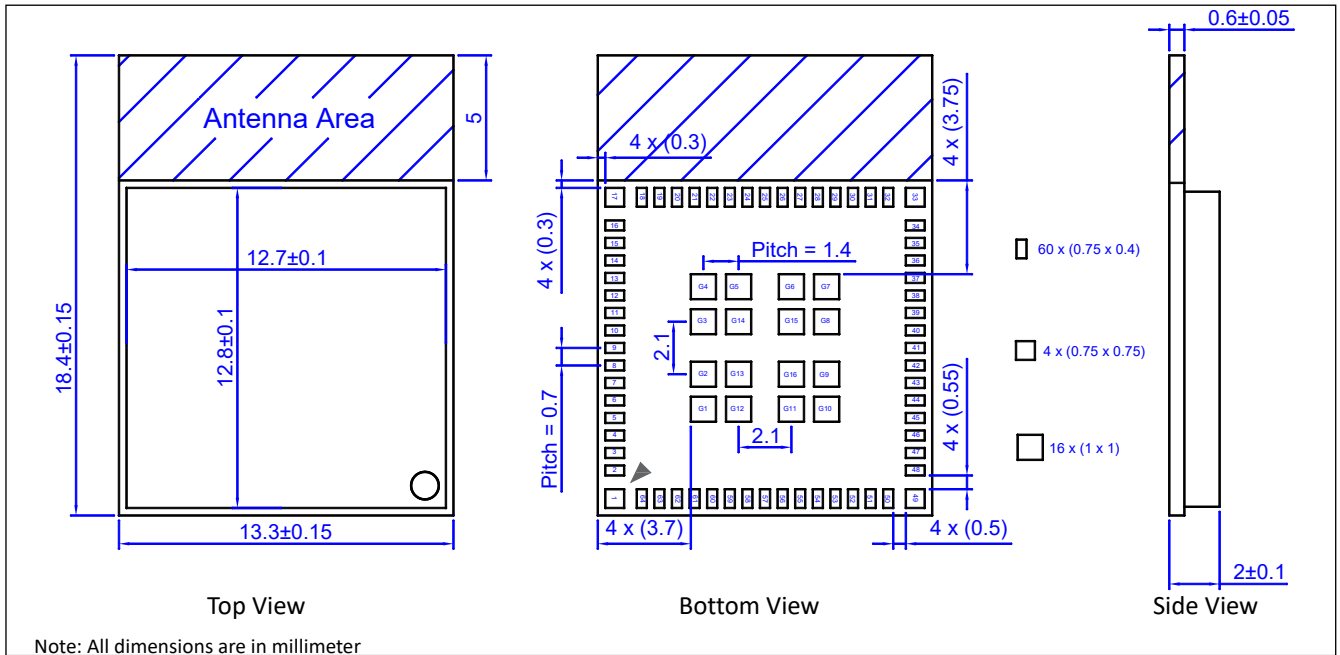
Mechanical Drawing of BDE-BW330XAP1, BDE-BW330XUP1 and BDE-BW330XUP2
